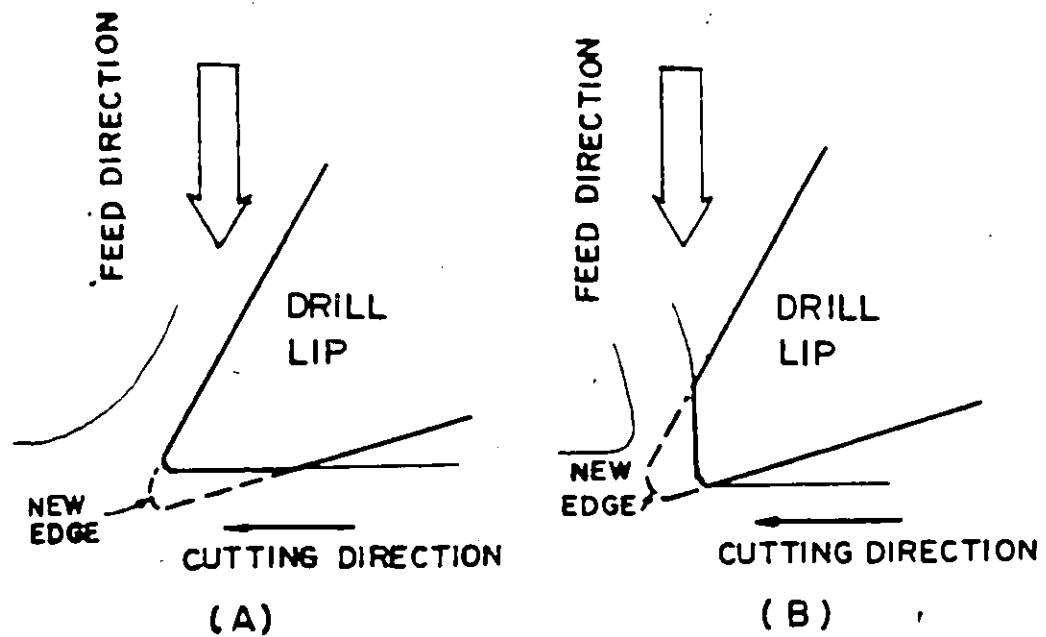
Two categories of the drill cutting edge defects.
